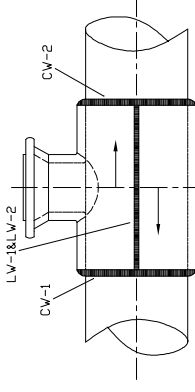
Encirclement Split Tee fitting welding sequence
